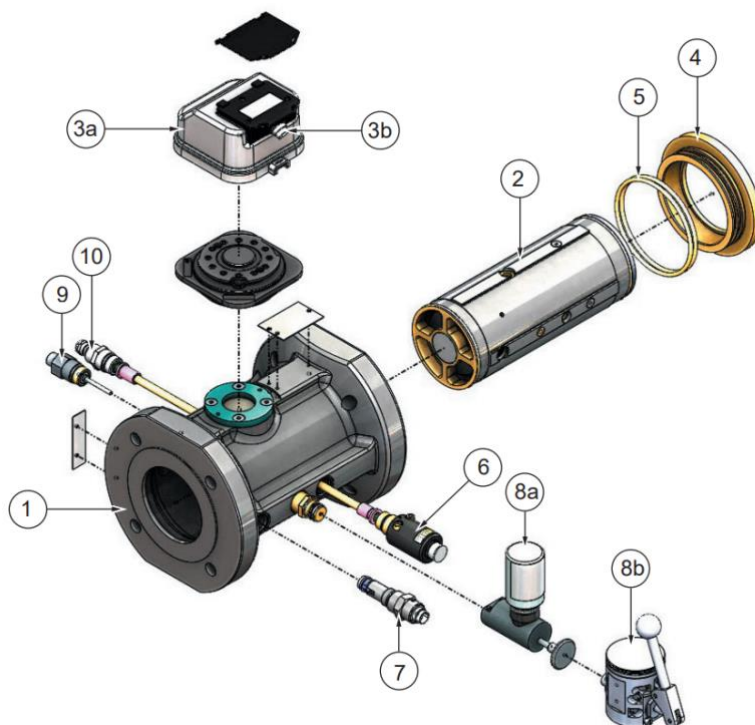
3D Exploded drawing of a gas turbine meters, e.g., the iM-TM model produced by Pietro Fiorentini for NG or H2NG mixtures up to 20%vol. (1) Body; (2) Measuring cartridge; (3) Totalising group – a) totalise, b) LF connection; (4) Flange ring; (5) O-ring; (6) High frequency sensor on main shaft; (7) High frequency sensor on turbine wheel, (8) Lubrication system – a) piston oil pump; b) hand lever oil pump; (9) Pressure transmitter; (10) Temperature transmitter. Image from Pietro Fiorentini (2023) [13].
